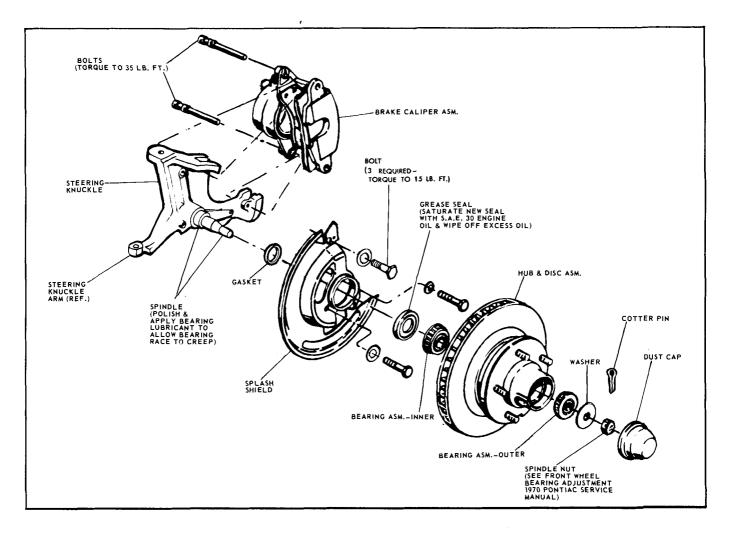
Installation of Steering Knuckle, Hub and Disc Assembly (B & F Series)
